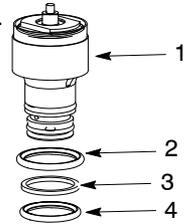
Piston/Cartridge Assembly and Needle Assembly
